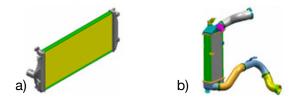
Air-to-Air CAC types. a) Full face b) Brick type [24]
